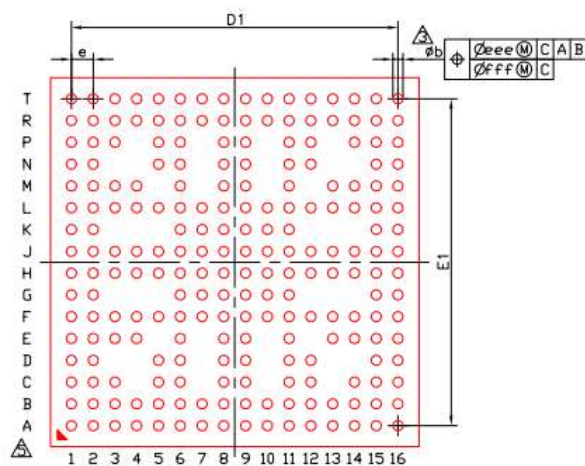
RK618 TFBGA(HF) Package Bottom View
